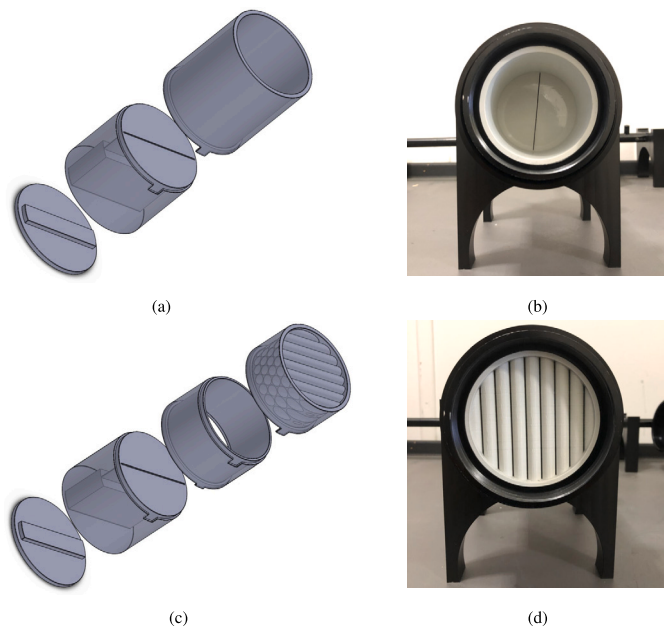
3D printed samples measured using an impedance tube with an inner diameter of 10 cm. (a) and (b): Exploded view and picture of the sample with only the resonator. (c) and (d): Exploded view and picture of the sample of the AM optimized for broad angle range of high absorption at 250 Hz. The pictures of the samples show them as installed in the impedance tube.
